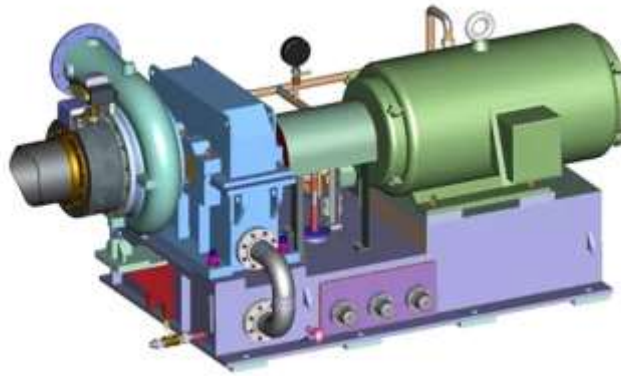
SHOWING A TYPICAL MOTOR / GEARBOX / BLOWER LAYOUT.
